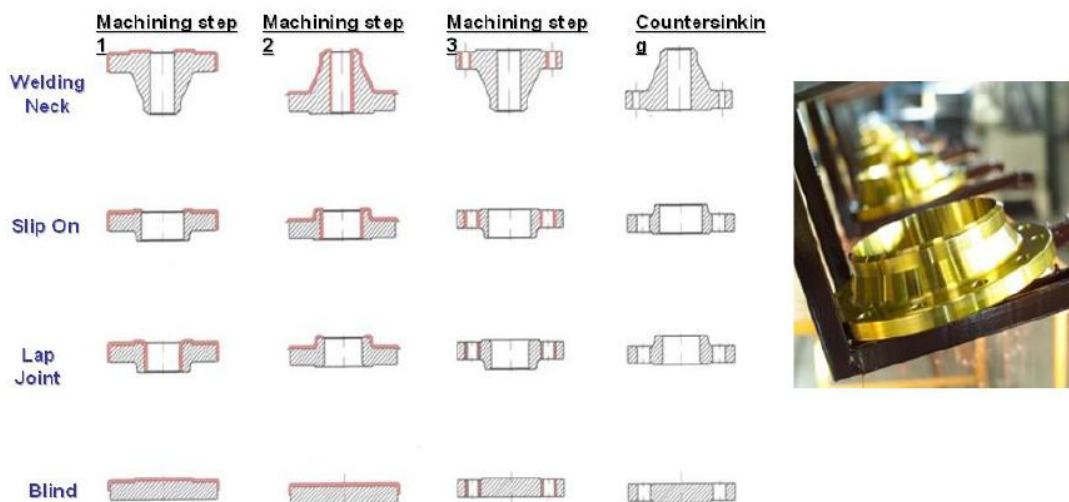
Machining process for flanges (in red the machined surfaces of that step)
